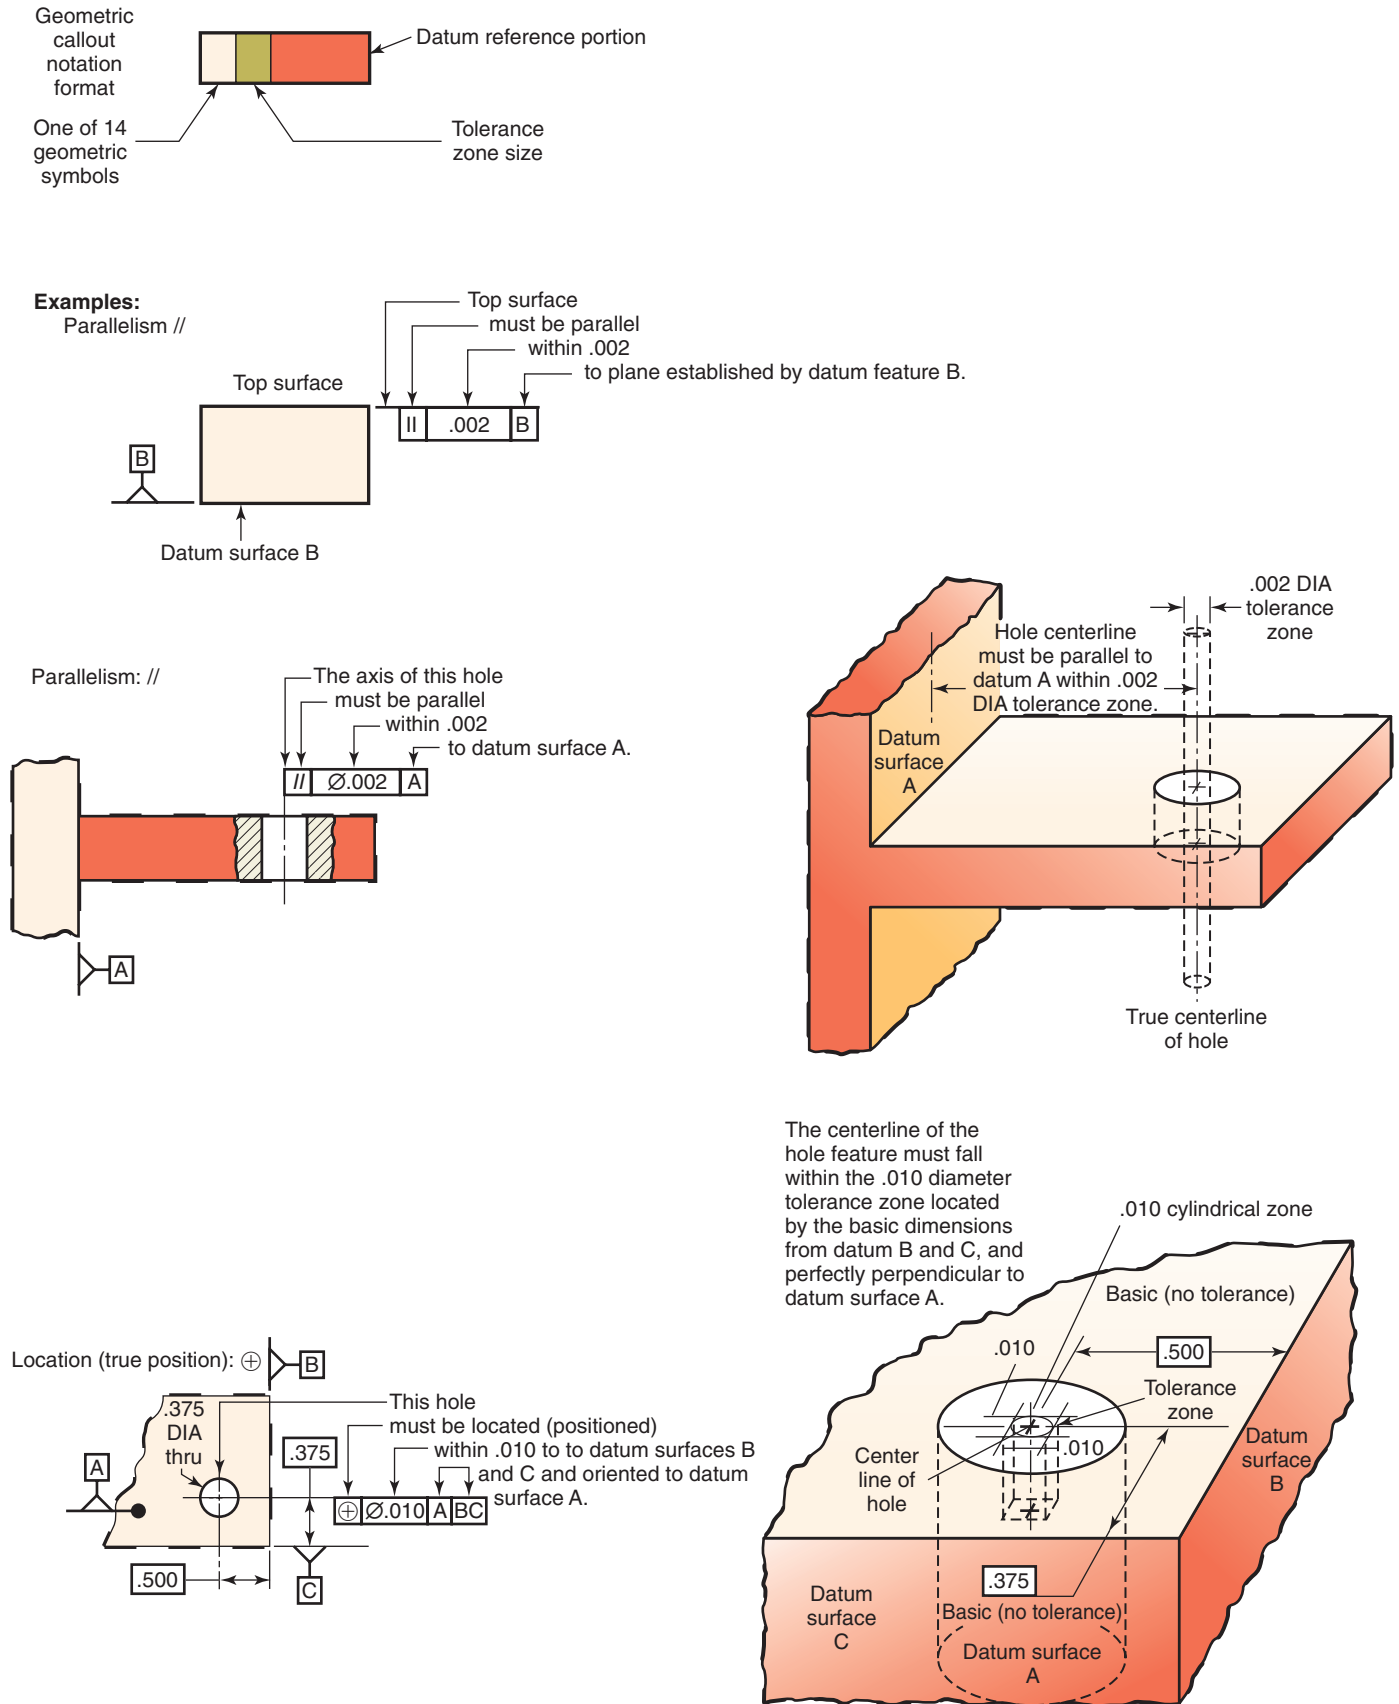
Drawing formats for geometric dimension and tolerances.
